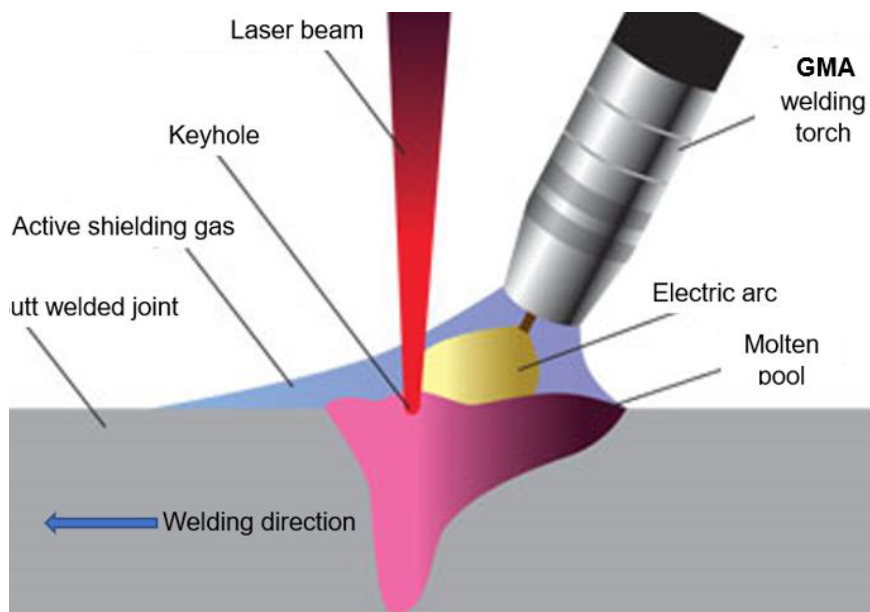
Schematic diagram of the laser hybrid welding process: laser beam + GMA (LHW) [19]
